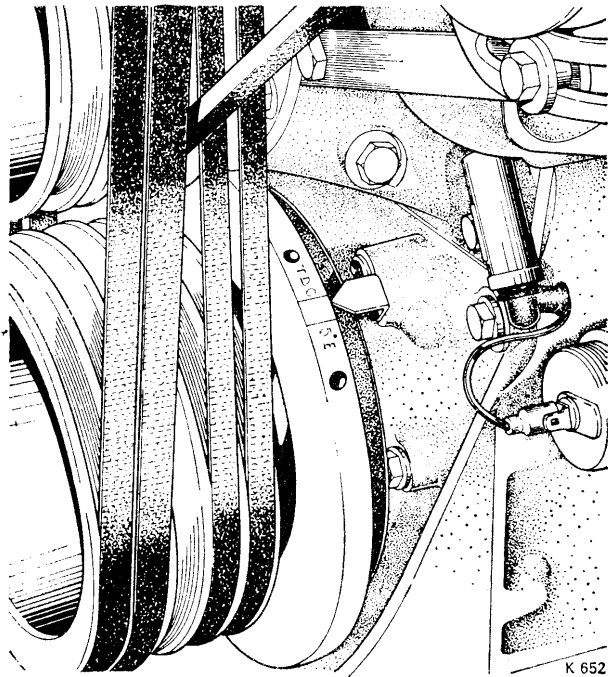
CRANKSHAFT DAMPER TIMING MARKS
